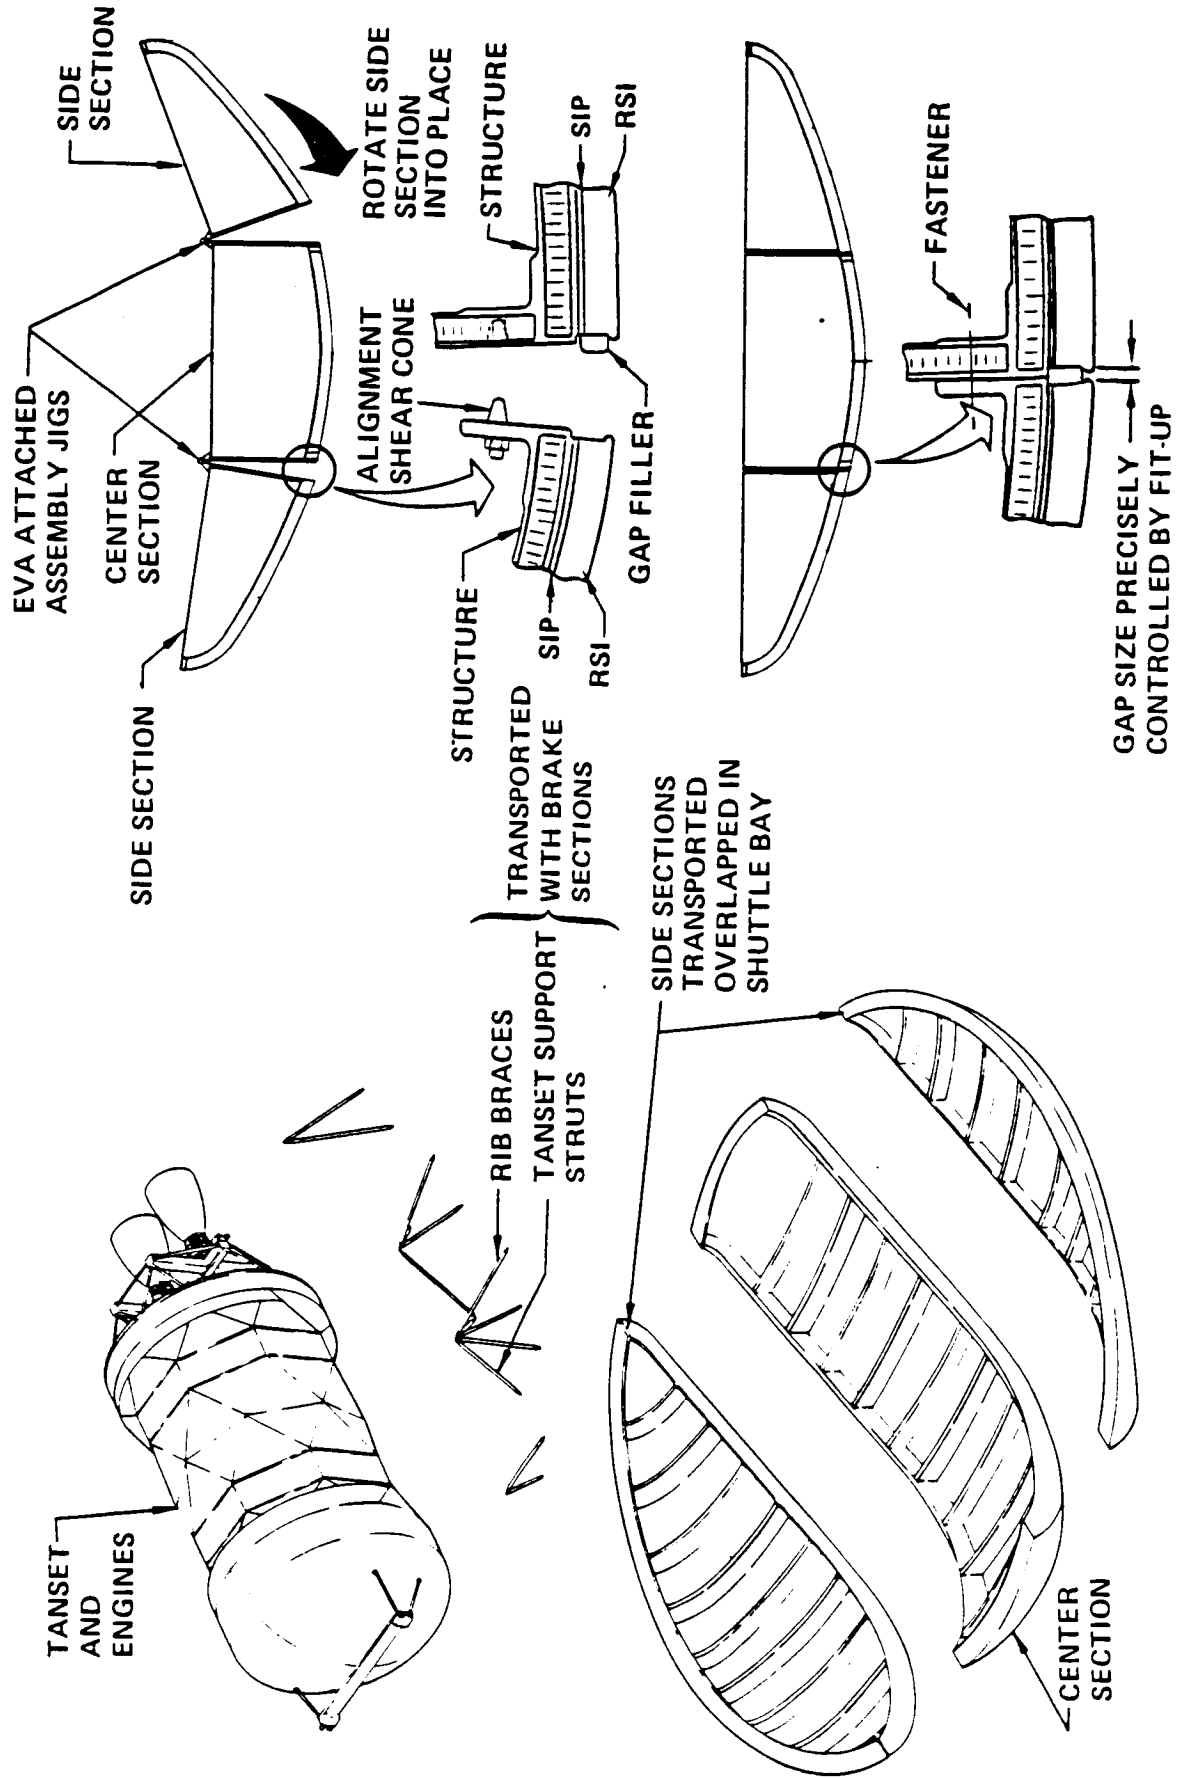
Shaped Brake Element Transport and Assembly
